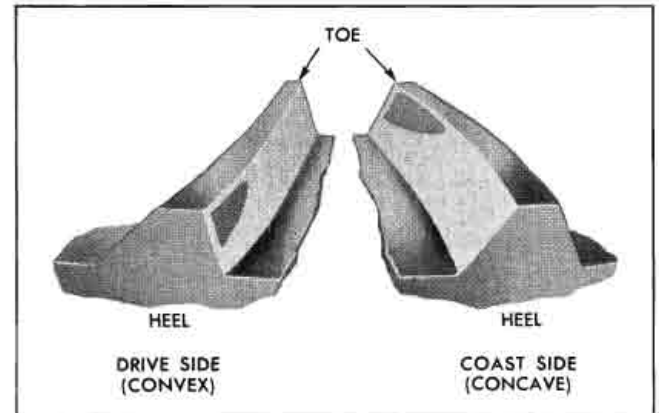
Tooth Pattern When Pinion is too Far Away From Ring Gear (Shim Pack Thickness Insufficient)
